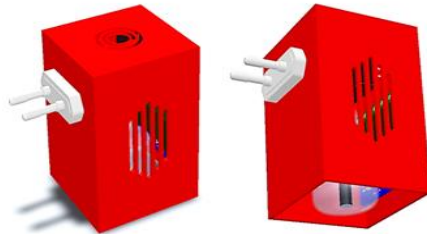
Shows a CAD model of the Outer Body of the Proposed Smart Mosquito Machine
